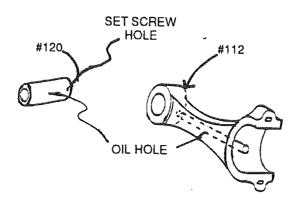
CROSSHEAD PIN AND CONNECTING ROD
